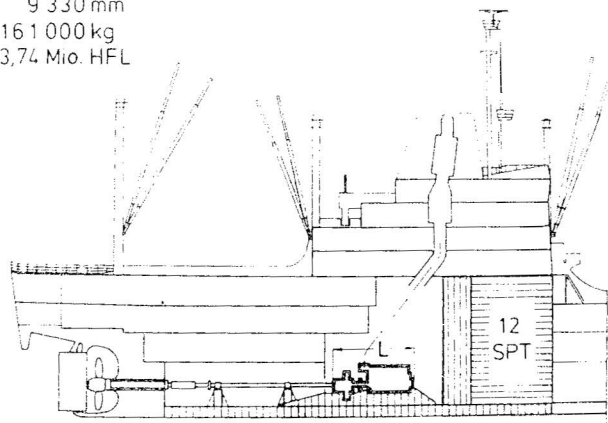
Conventional arrangement of the medium speed diesel main engine(s)—two motors
